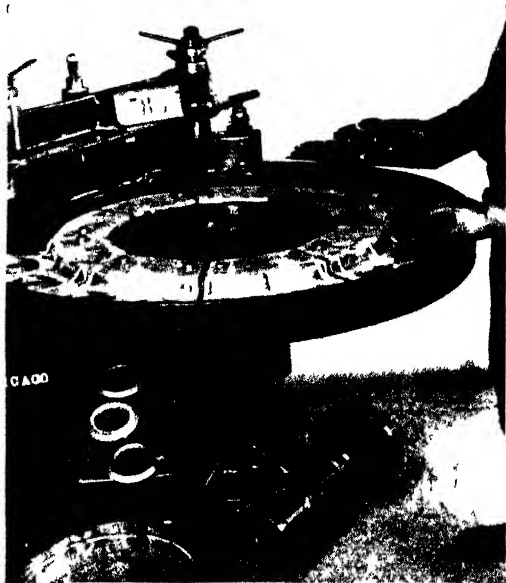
A 30-in Besly grinder with rotary feeding fixture.
